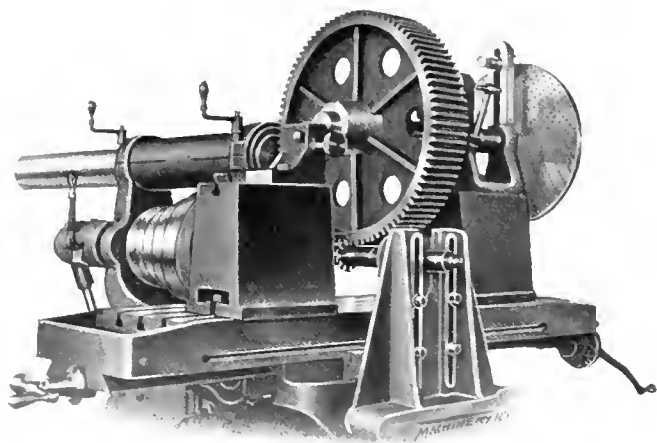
Attachment for cutting Gears of Large Diameter on Cincinnati Milling Machines.
